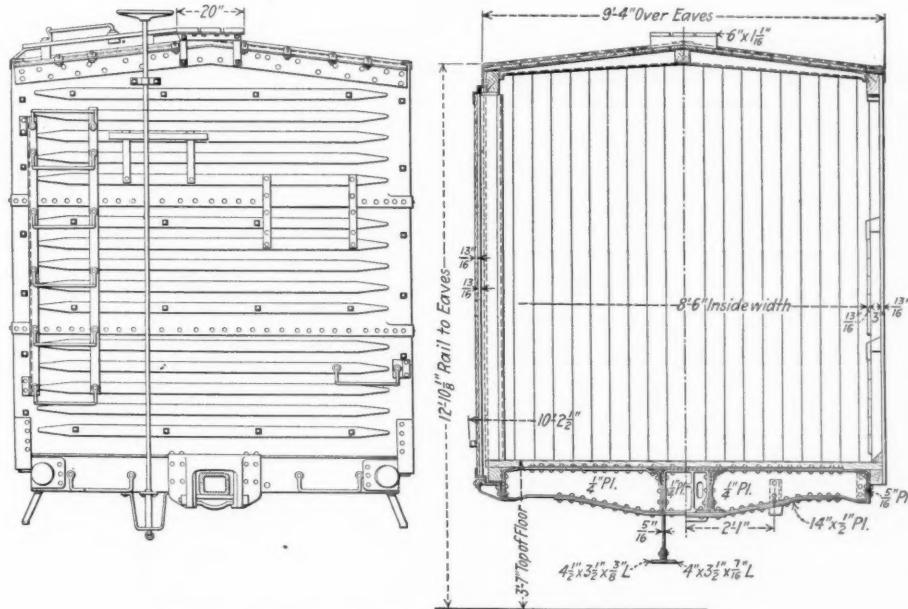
Sections of the 40-Ton Double Sheathed Box Car
